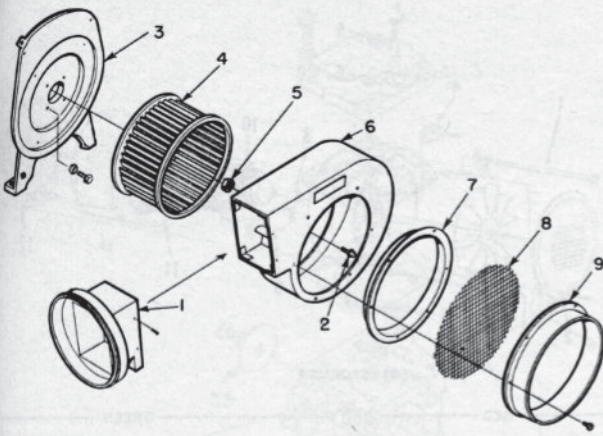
Exploded view of blower unit. Remove blower housing and rotor to allow unbolting and removal of blower plate (1) from engine.
